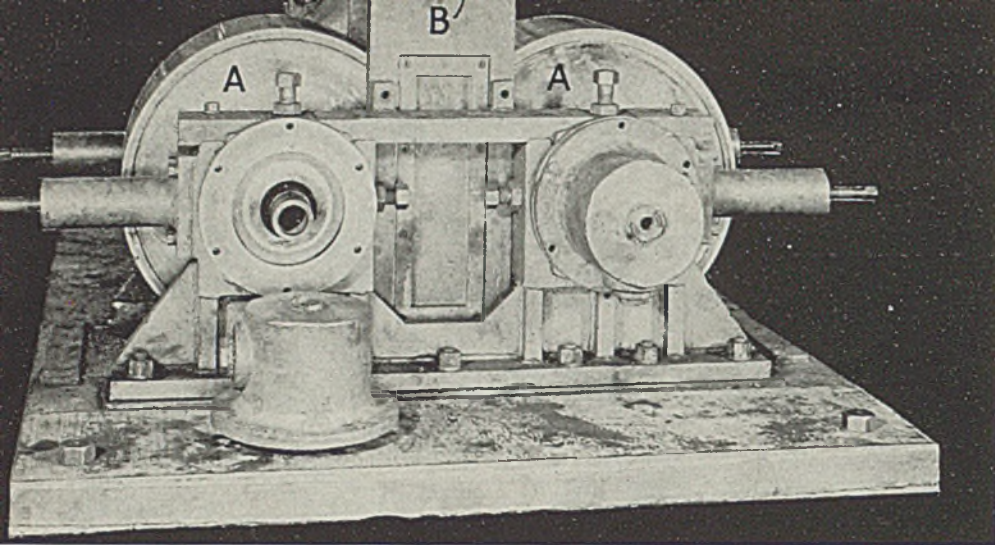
Front view of 7000-pound per minute film-impact casting machine taken on shop assembly floor. Rolls are designated A, and top funnel, B
